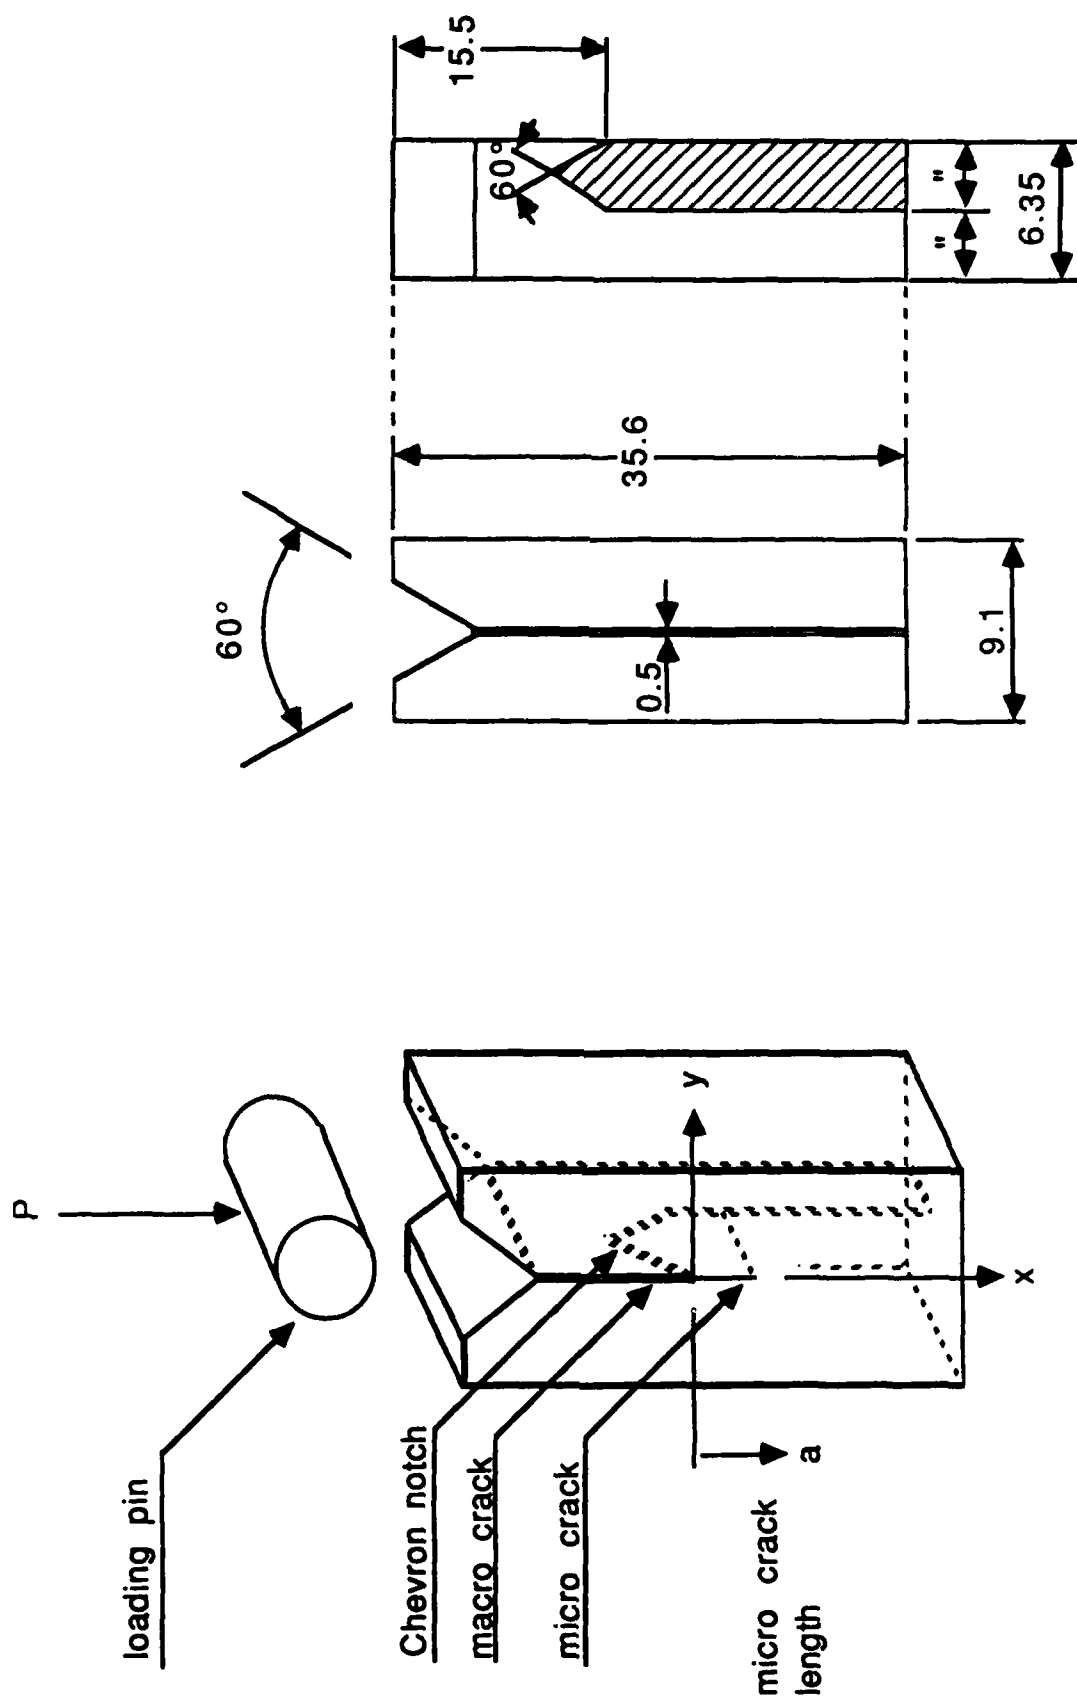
Wedge-loaded double cantilever beam (WL-DCB) specimen with chevron notch and loading pin. All dimensions in mm.
